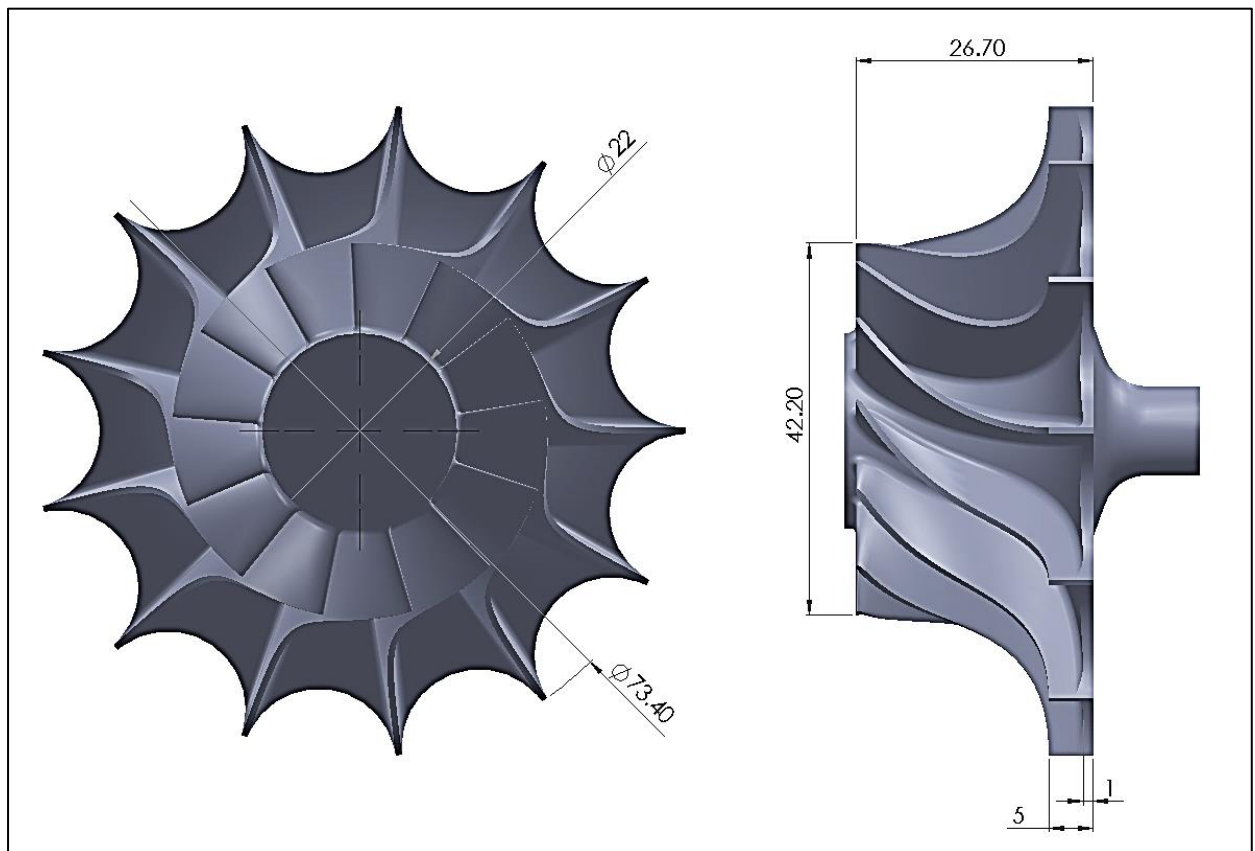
front and Right-side view for the designed rotor wheel (units are in mm).
